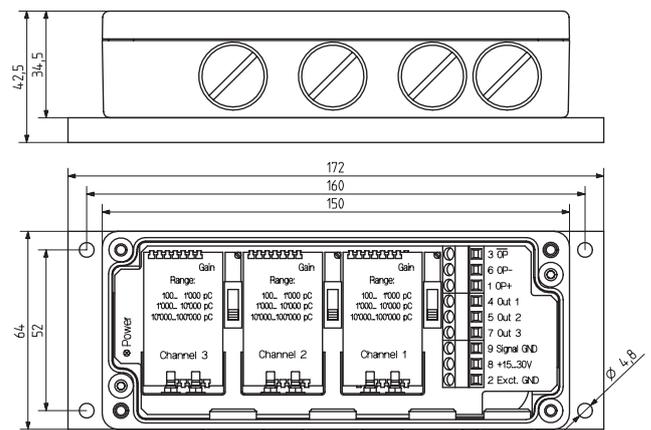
Dimensions of industrial charge amplifier Type 5038A...
